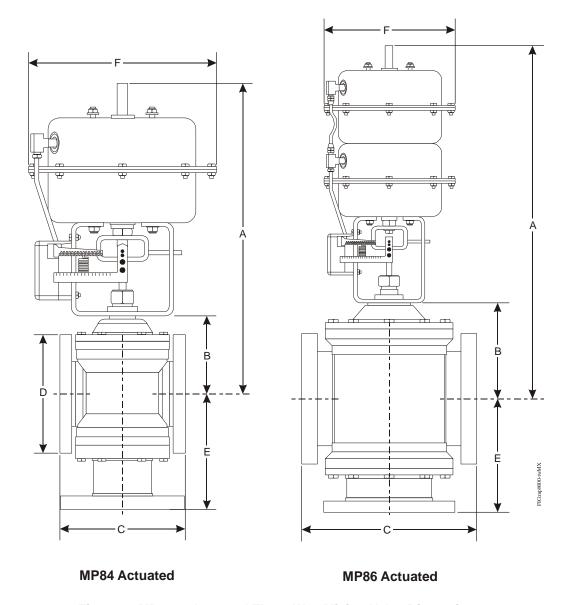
MP8000 Actuated Three-Way Mixing Valve Dimensions (See Table 3.)
